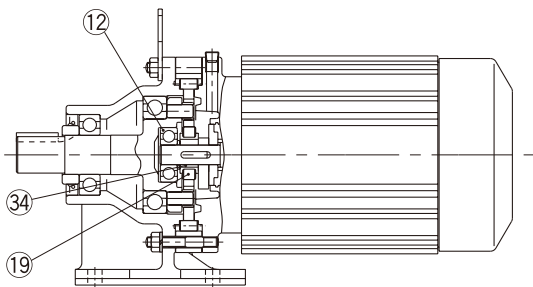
Type CNHM (Horizontal, Gearmotor) Single reduction
